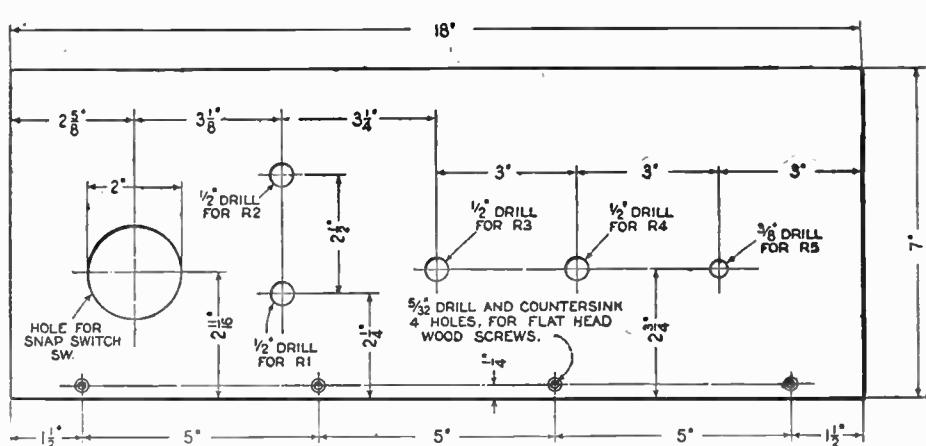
This diagram shows the exact positions and dimensions of all holes required in the front panel for mounting the various parts shown in the pictures.
